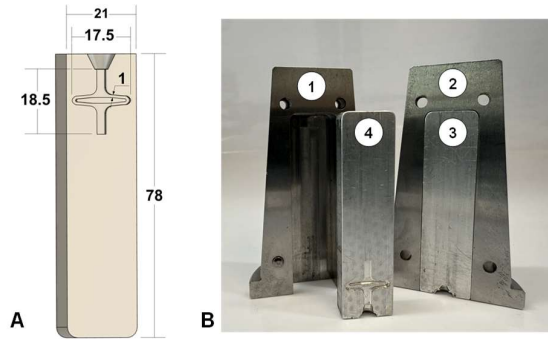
CAD construction of custom mold inlay (A) and assembly of manufactured inlay-system mold (B). 1) first outer mold half, 2) second outer mold half, 3) inlay half blank, 4) inlay half with stent segment cavity
